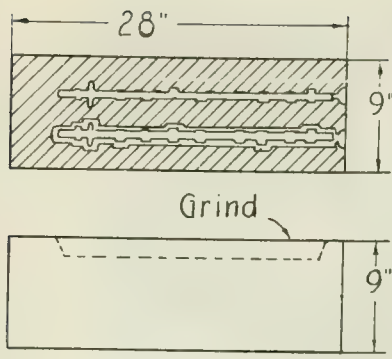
A CAMSHAFT FORGING DIE, GROUND WITH SUCCESS.
